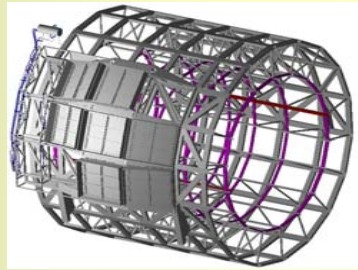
ALICE space frame with the HMPID support cradle and seven detector modules.
